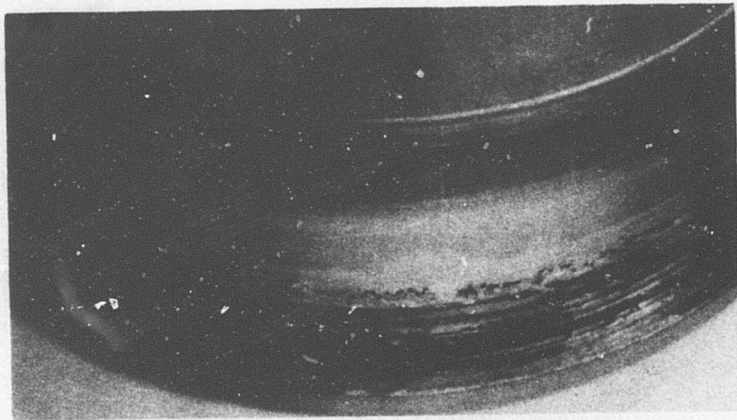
XC11439-Series Bearing After Test, Bearing No. 73-49, Test No. 3--Damaged Due to Insufficient Bearing End-Play Adjustment.
